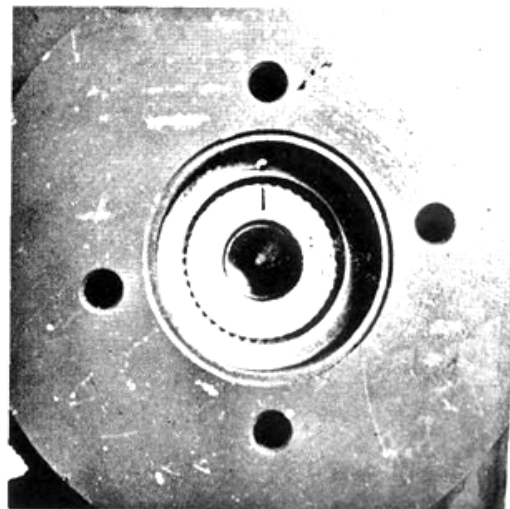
Pulley and Crankshaft Markings Correctly Aligned
